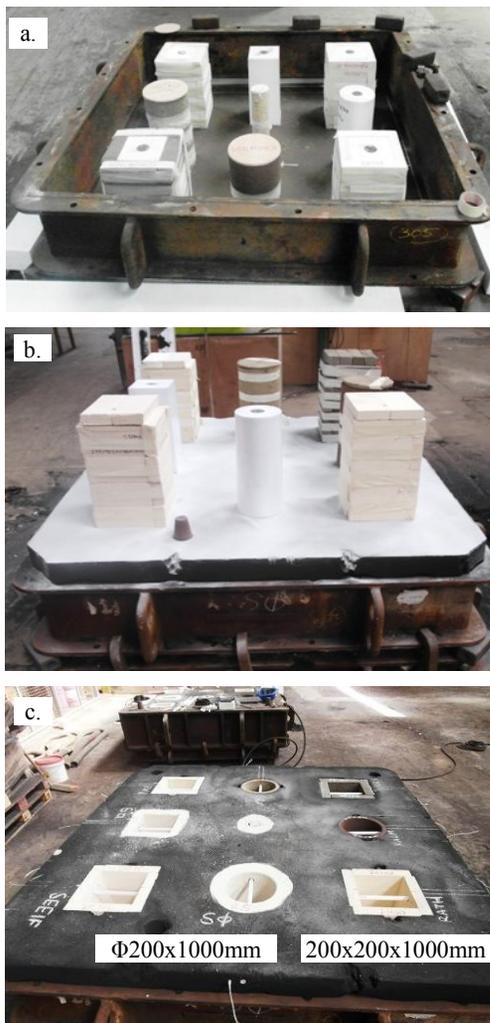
Selected stages of producing a mould containing tested materials: iso-exo sleeves and insulating bricks. a – patterns with assembled materials – lower (drag) mould, b – preparation of upper (cope) mould, c – mould instrumentation
